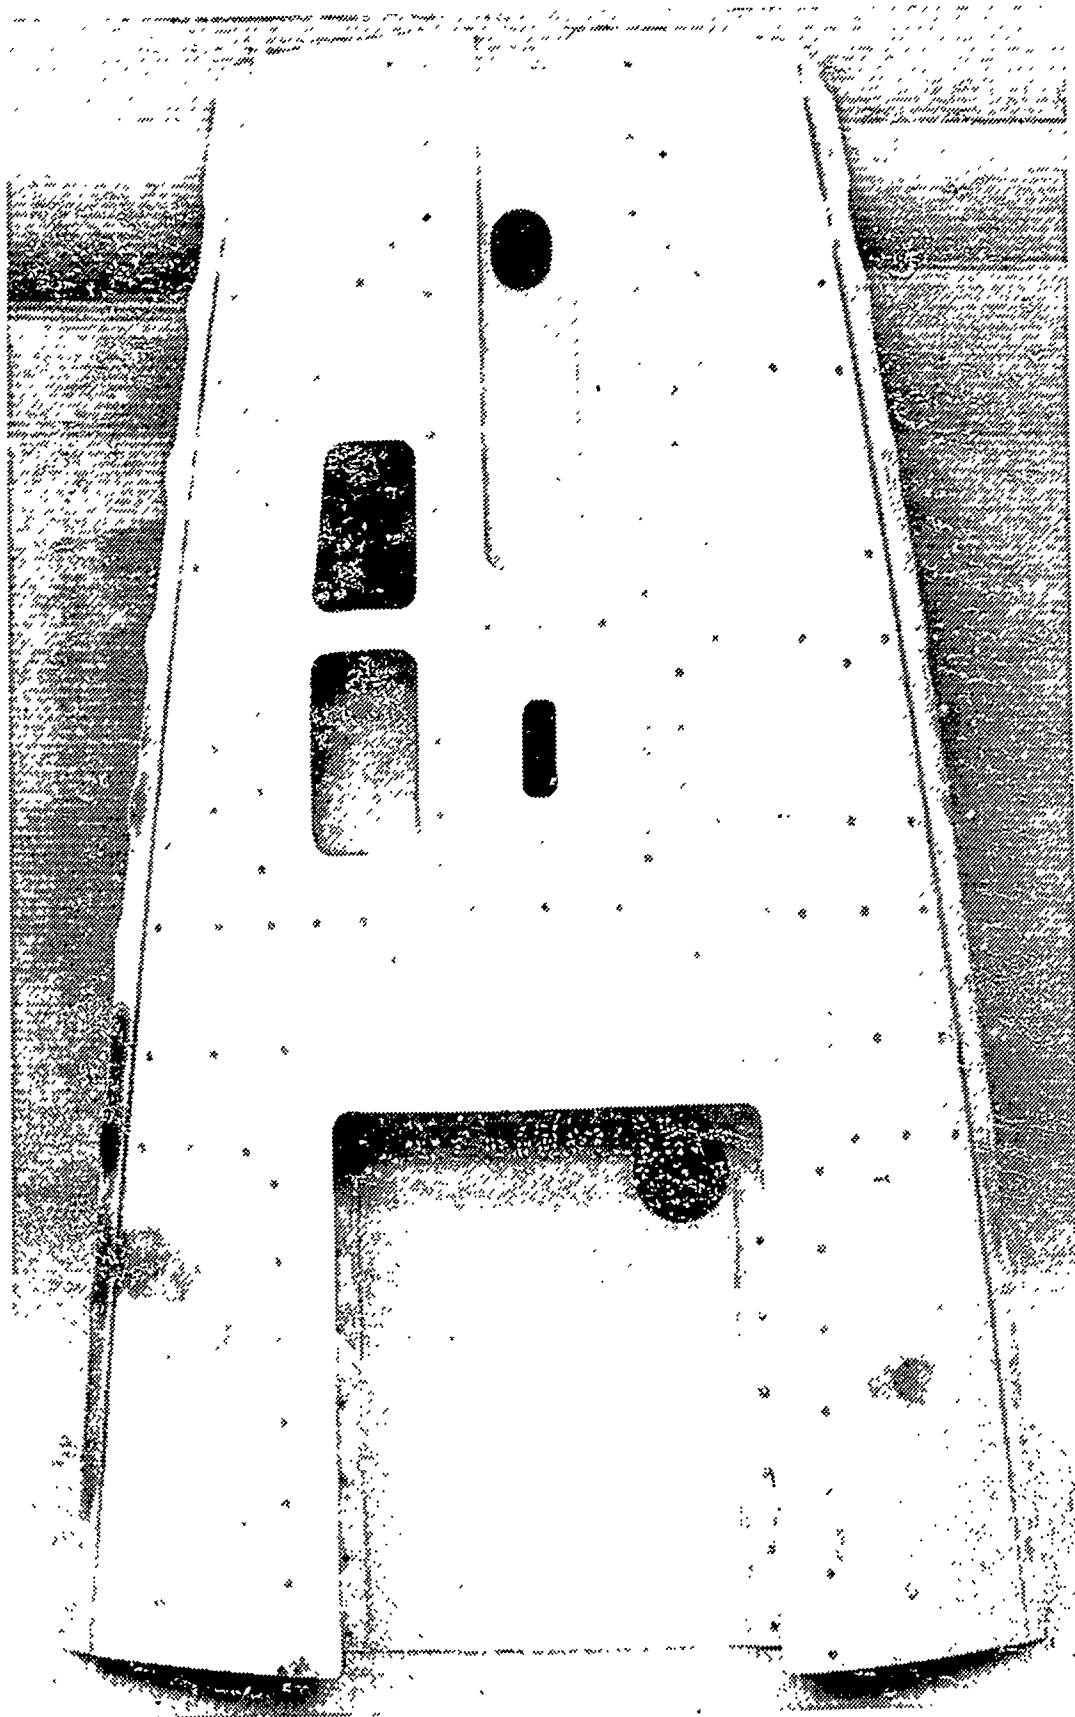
Lower View of Assembled Deck Prior to Door Installation
